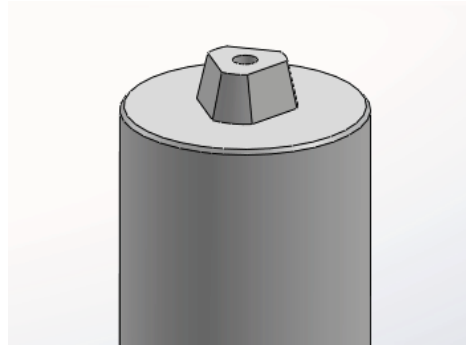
Tool geometry with thermocouple hole location at centre.
